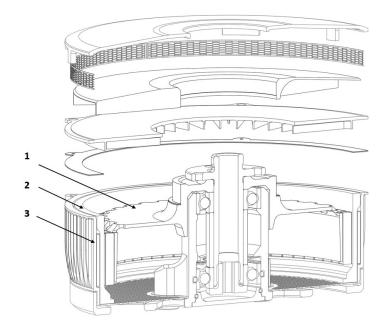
Exploded view of Alva's electric motor with Rotor(1), Windings(2), and Stator(3) numbered.
